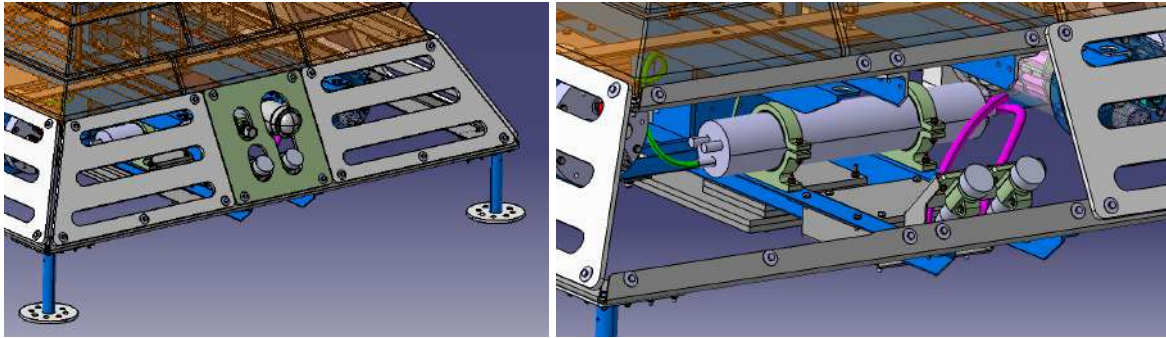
AQUATEC Acoustic Profiler Assembly Technical Drawing.
